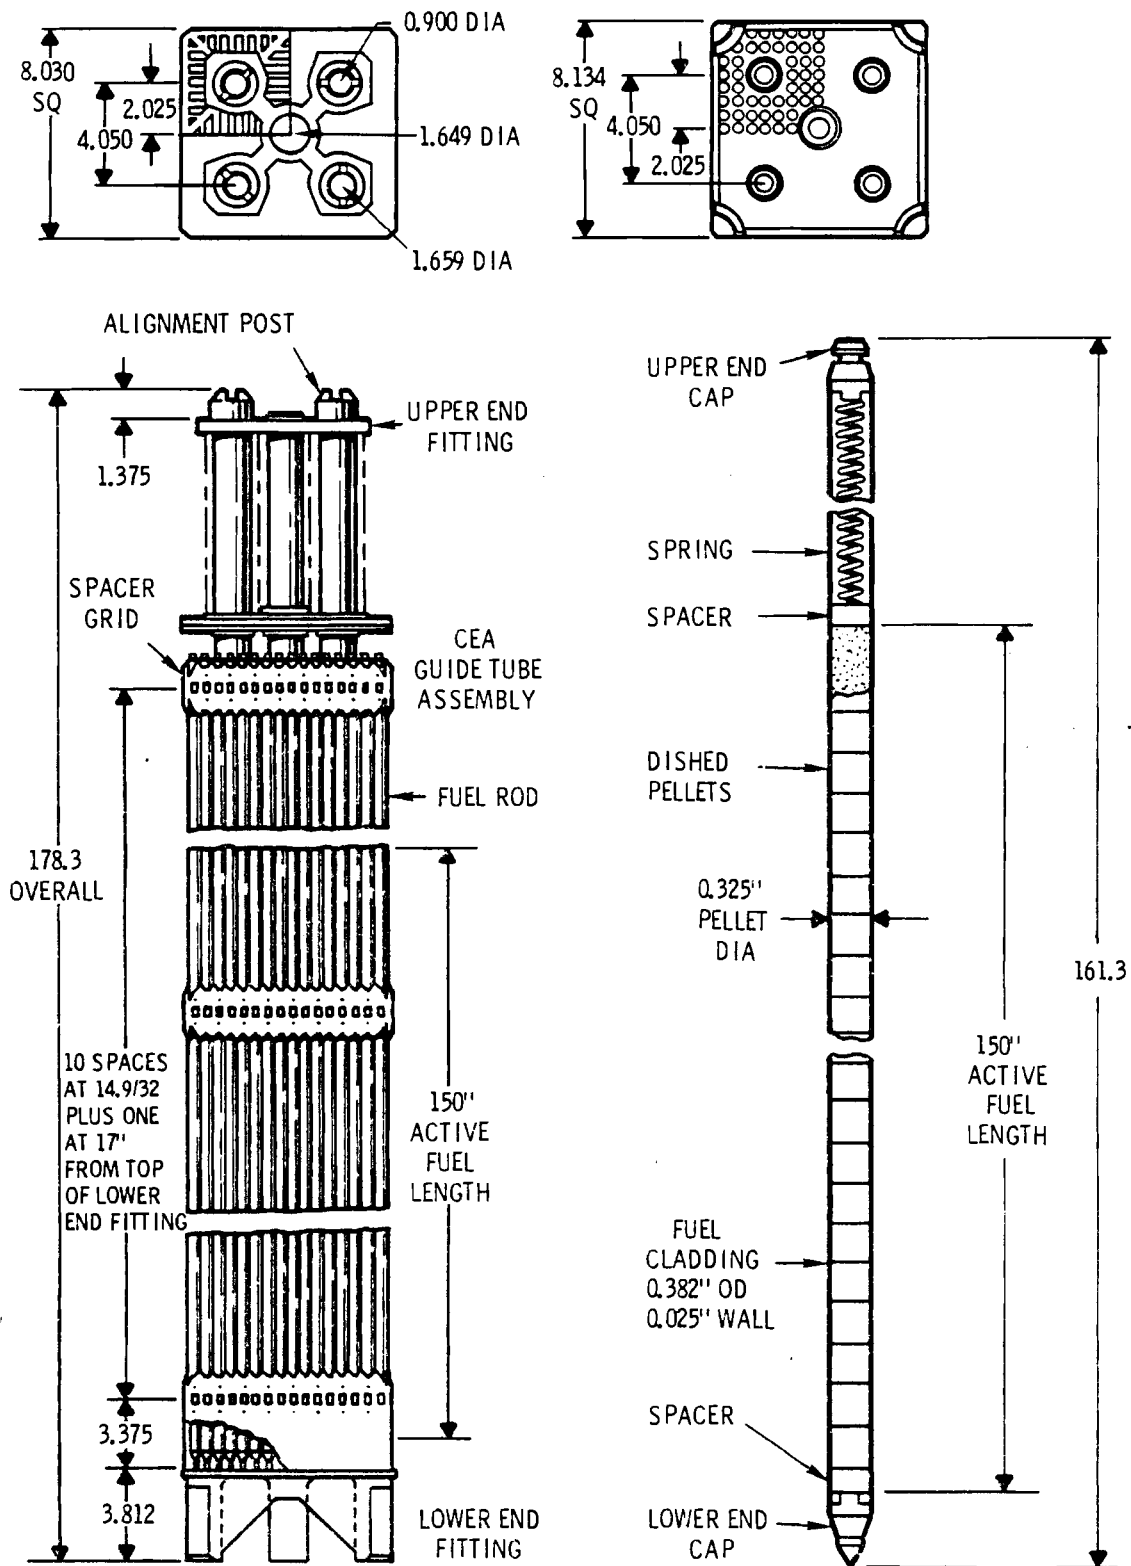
Combustion Engineering 16x16 PWR Fuel Bundle and Fuel Rod
